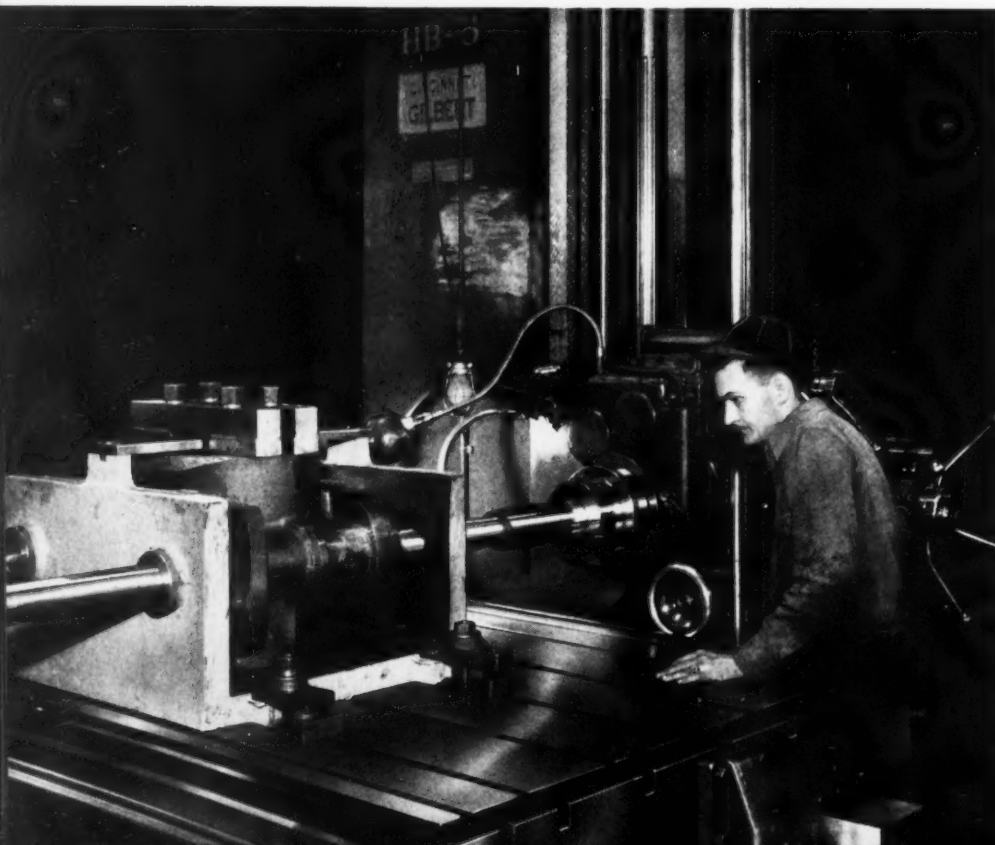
A Hydrotel Milling Machine is Used for Face-milling Joint Faces of Crankpin Bearings prior to the Bolt-hole Boring Operation
